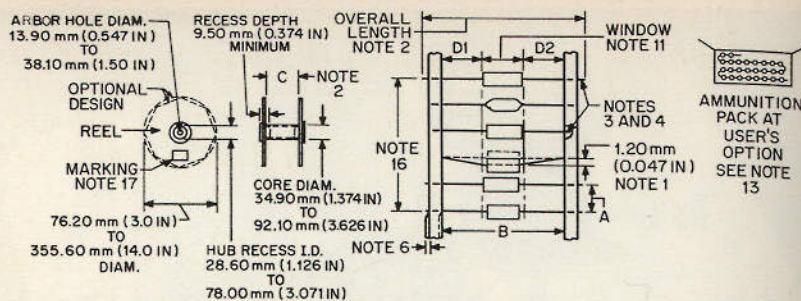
Lead tape reel packaging of axial-lead components (from EIA Standard RS-296).
